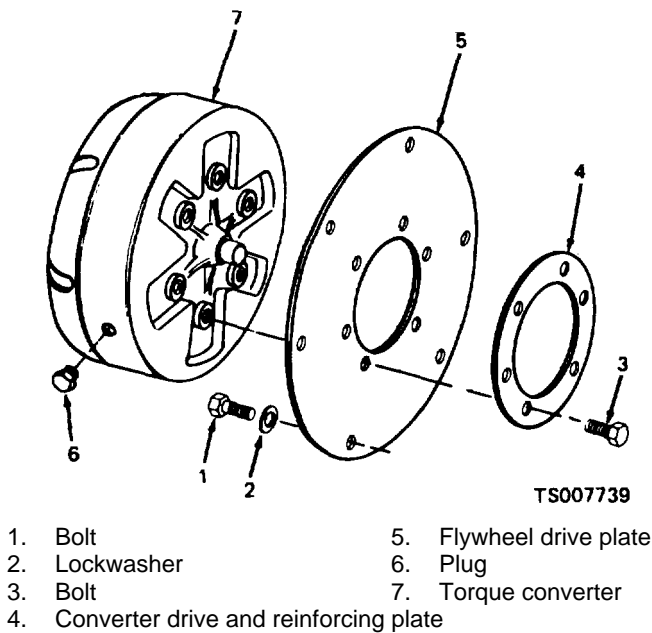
Torque Converter and Drive Plates, Exploded View.
